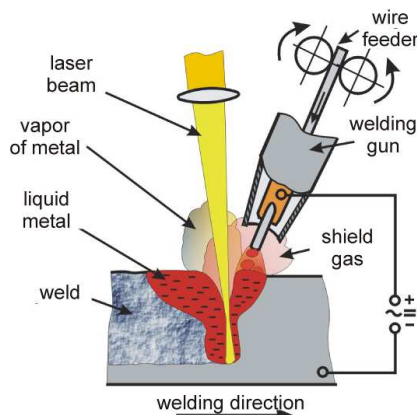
The hybrid (laser + MAG) welding process [10]
